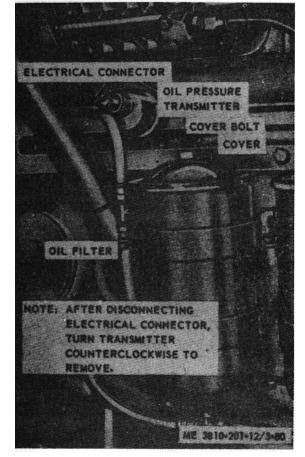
Lubricating oil pressure transmitter, removal and installation
